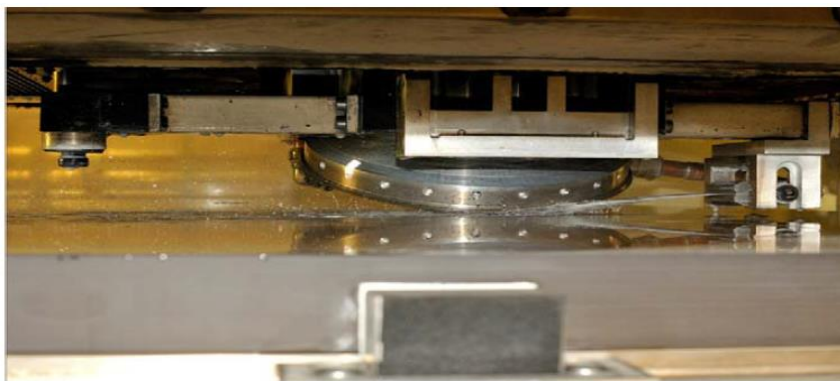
An E-ELT segment is processed using a D25 grinding wheel [88]
